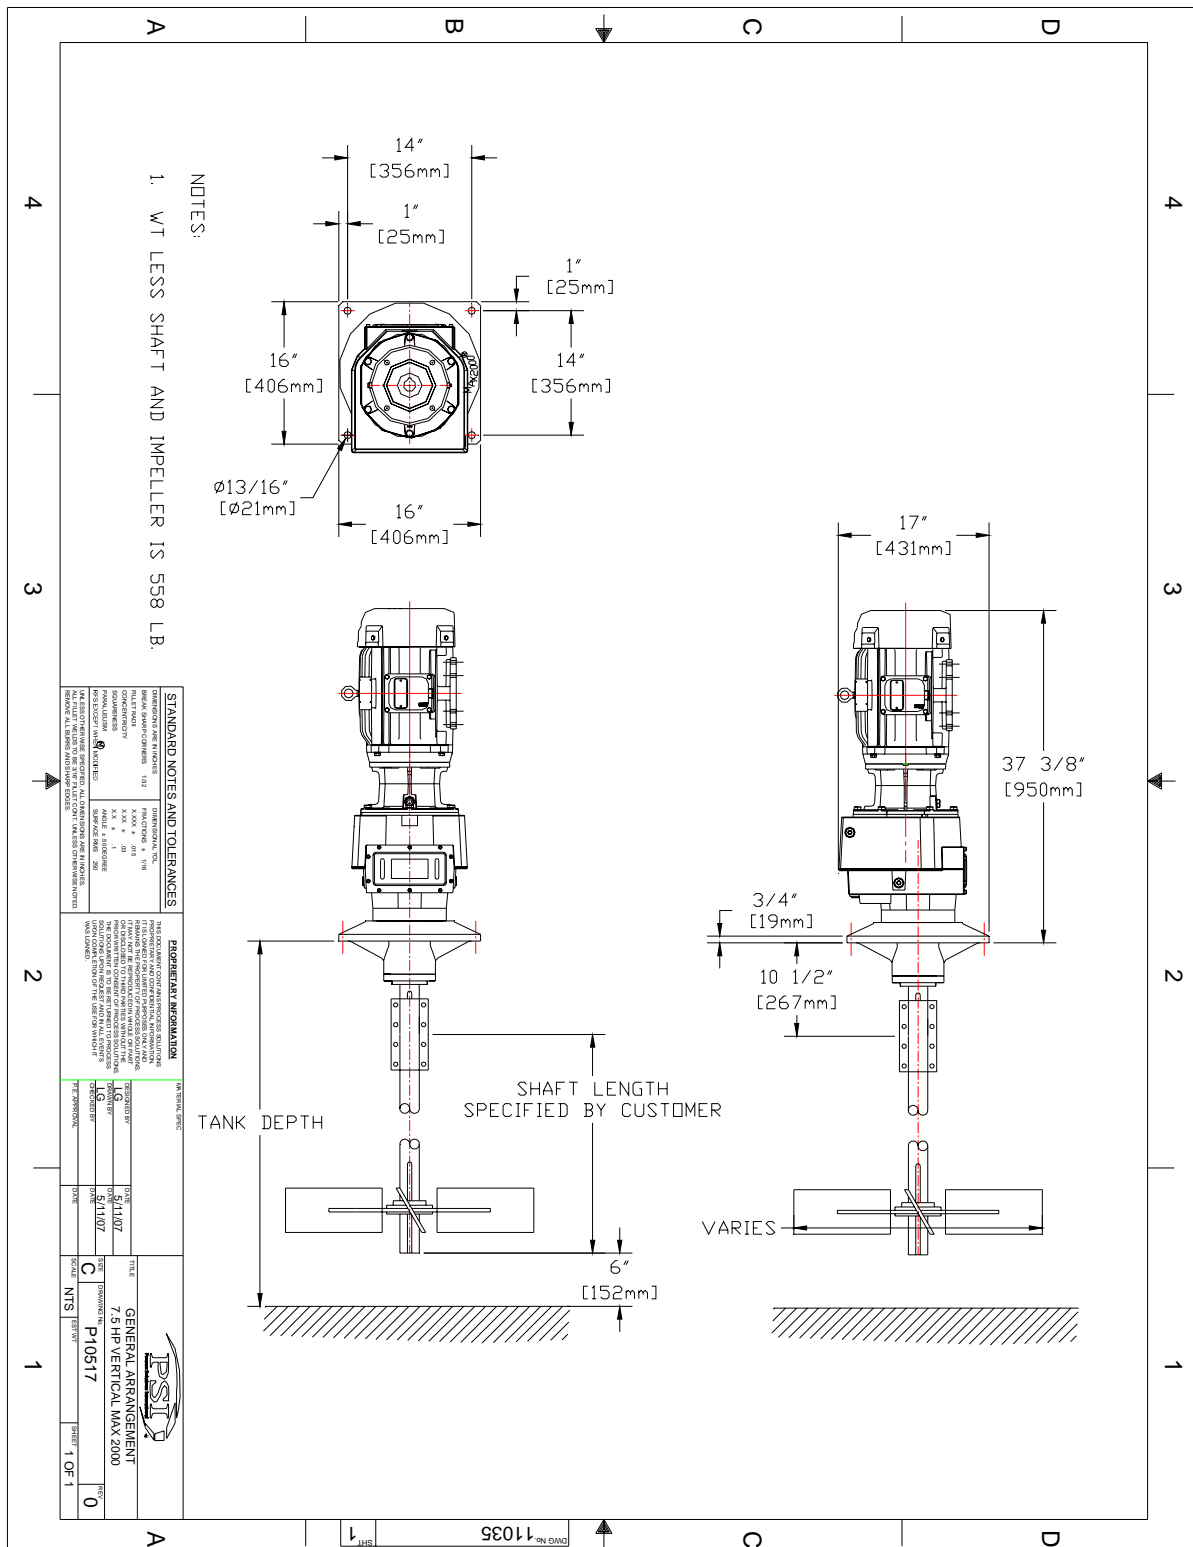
DIMENSIONAL DRAWING MAX-MA07V
